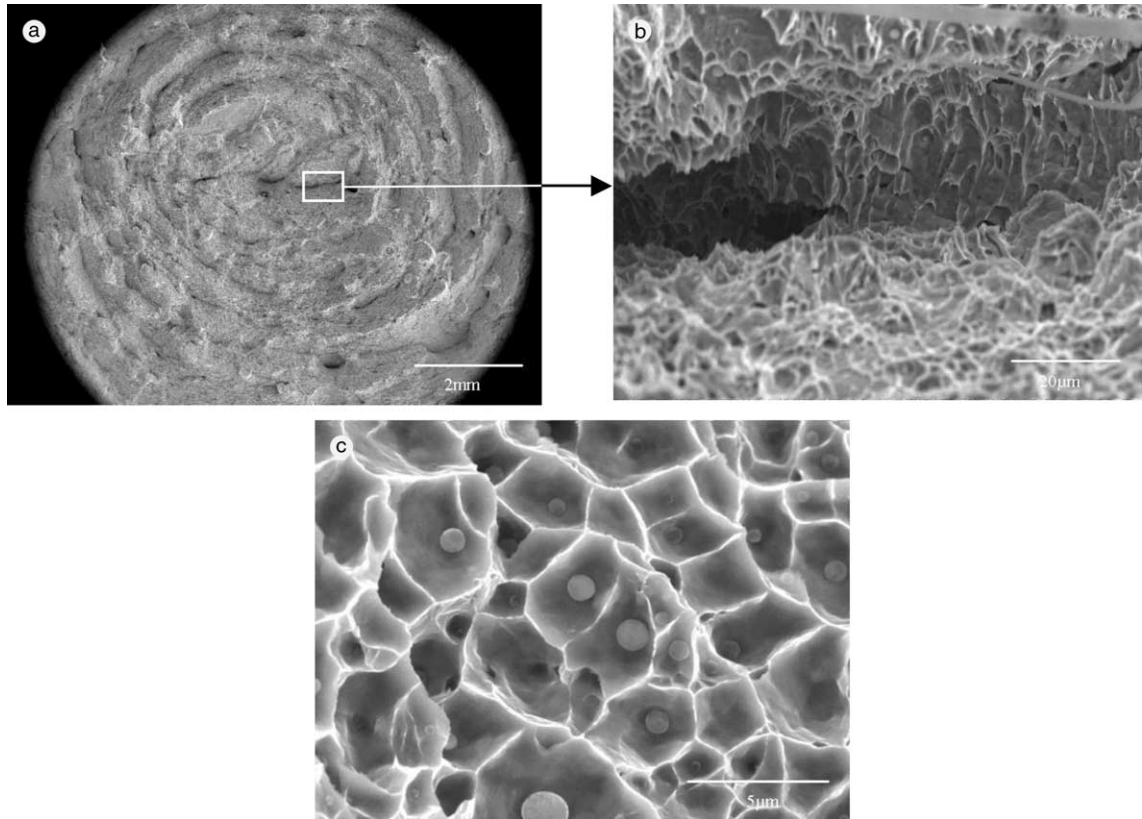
Fractographic examinations of axisymmetric notched specimens for weld deposited metal.
